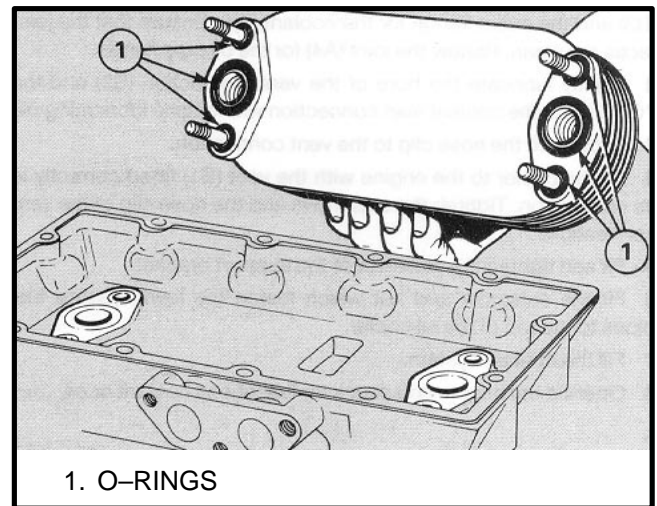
JOINTS FOR THE COOLER ELEMENT, ENGINES YA AND YB
